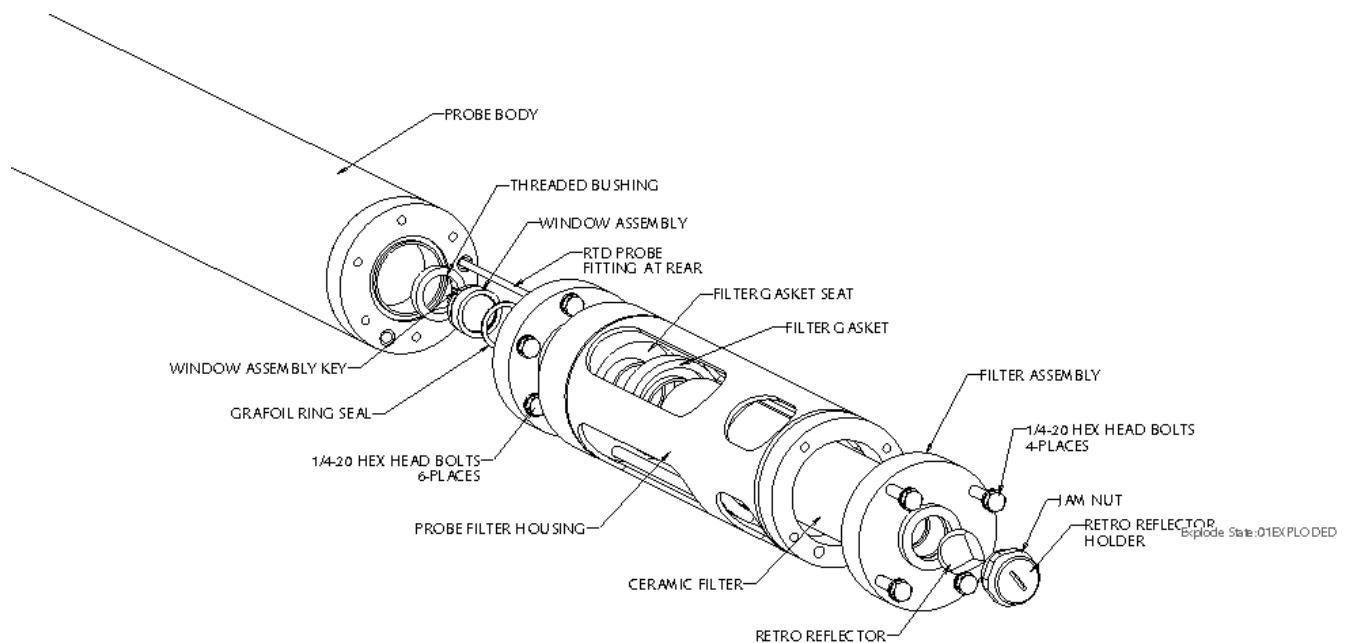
Probe Tip Assembly (For 37.5cm, 50cm or 75cm cavities)
